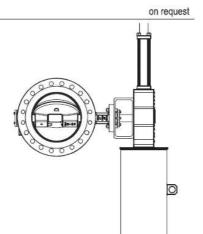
ARI-ZETRIX®ANSI threaded flange
